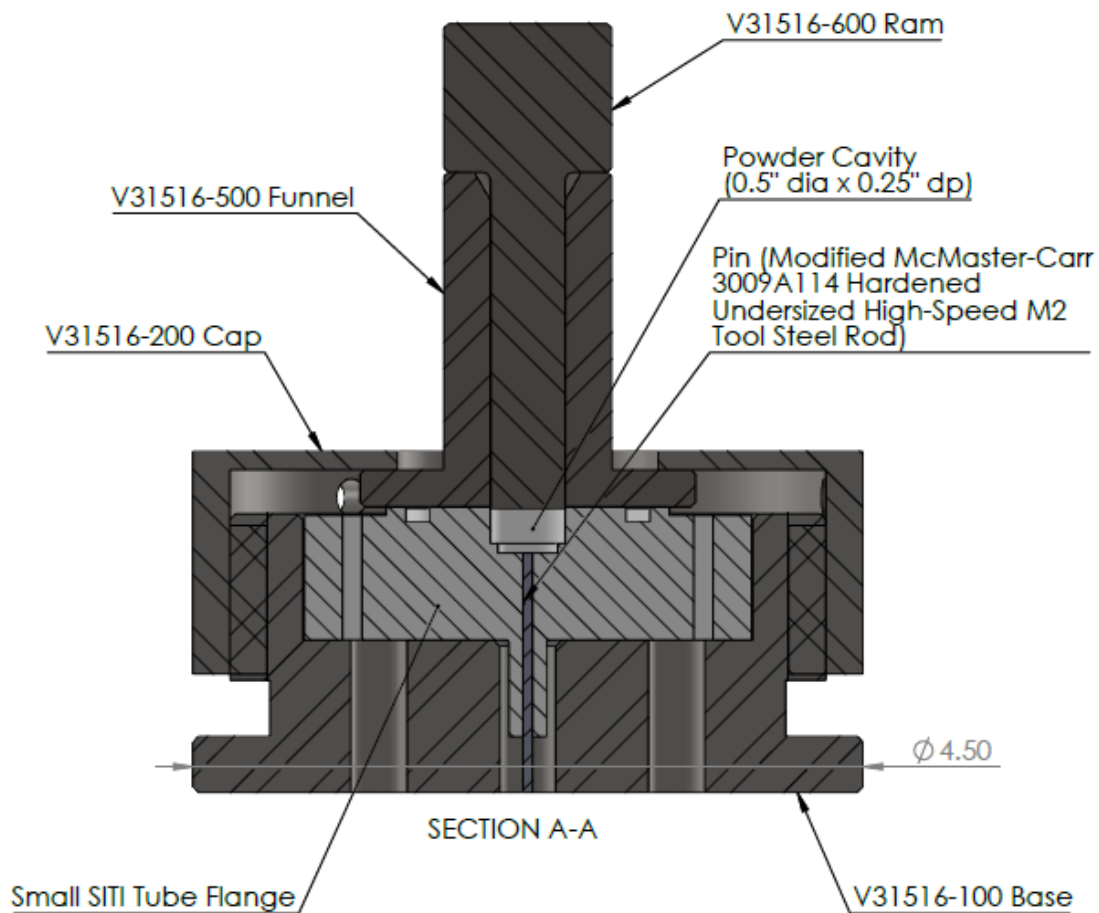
Cross-sectional illustration of a small SITI Tube Flange in a V31516 Loading Fixture.
